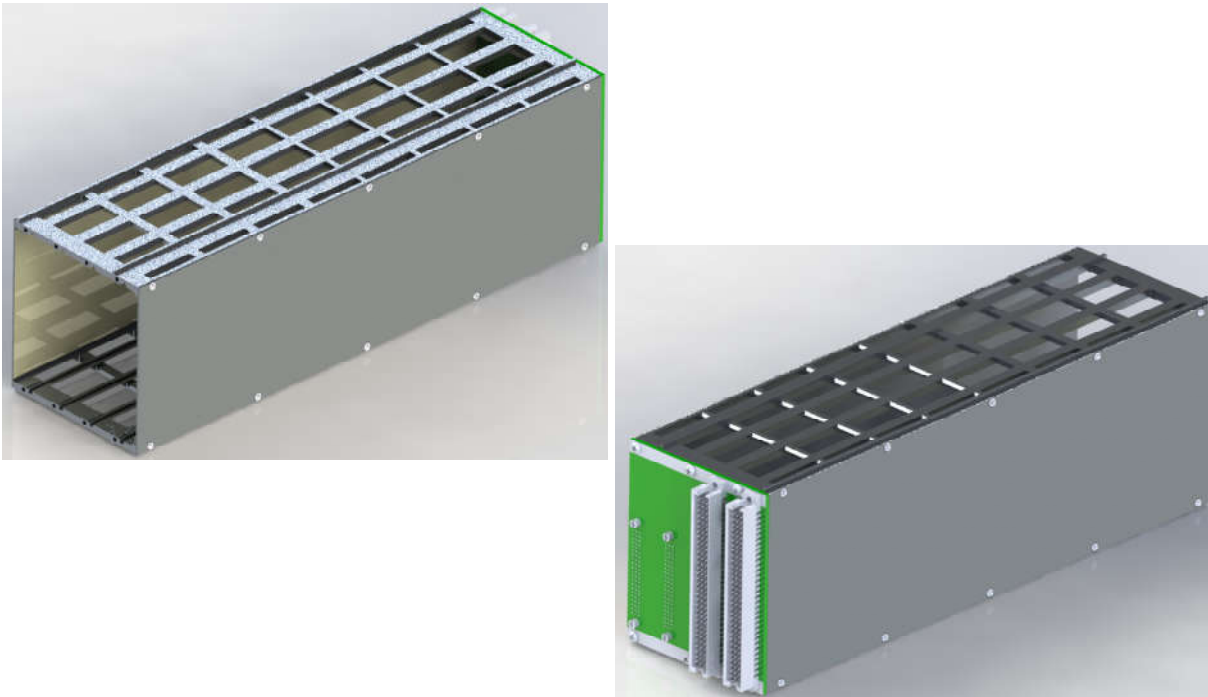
EX1200-SMP-4 CARRIER MODULE (FRONT & REAR VIEW)
